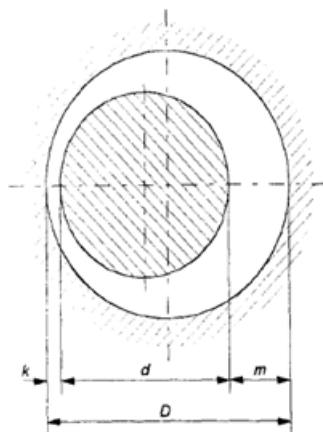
Joint with floating gland for shaft of rotating electrical machine
